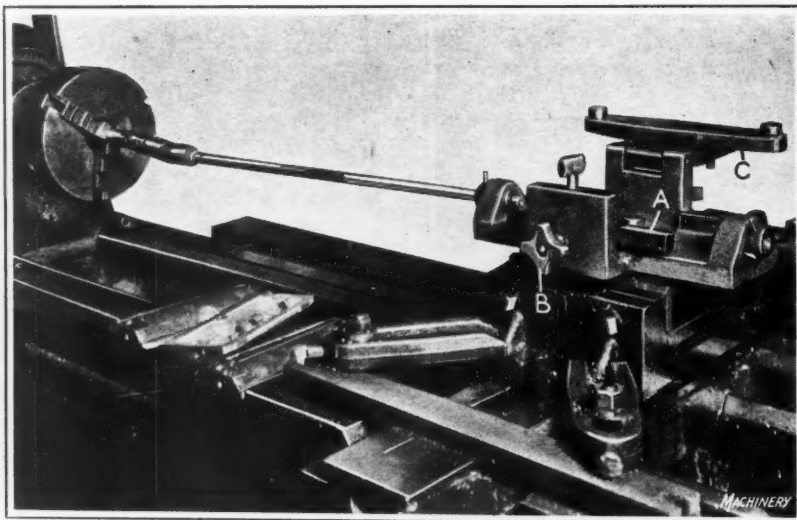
Lathe set up for line-reaming Valve Follower Covers
